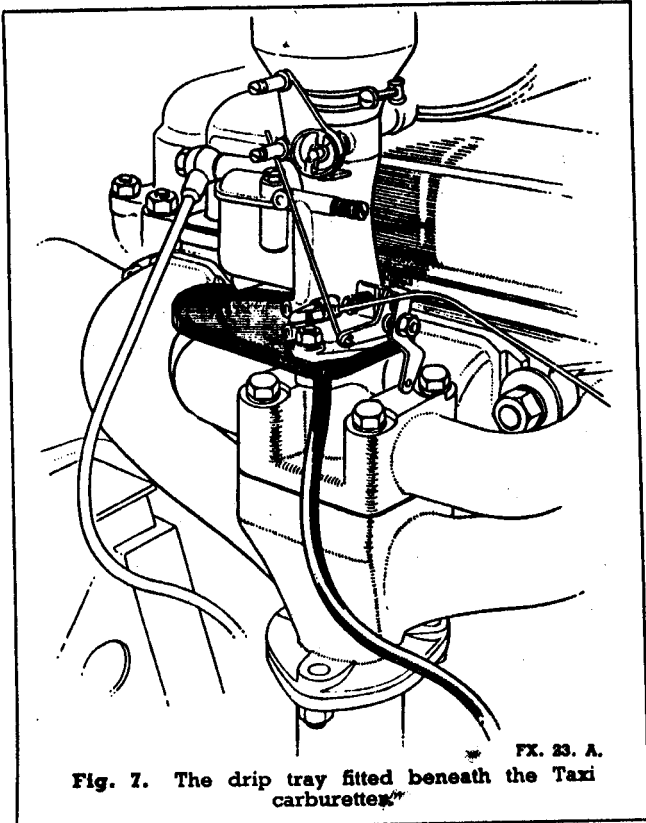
The drip tray fitted beneath the Taxi carburettor.
